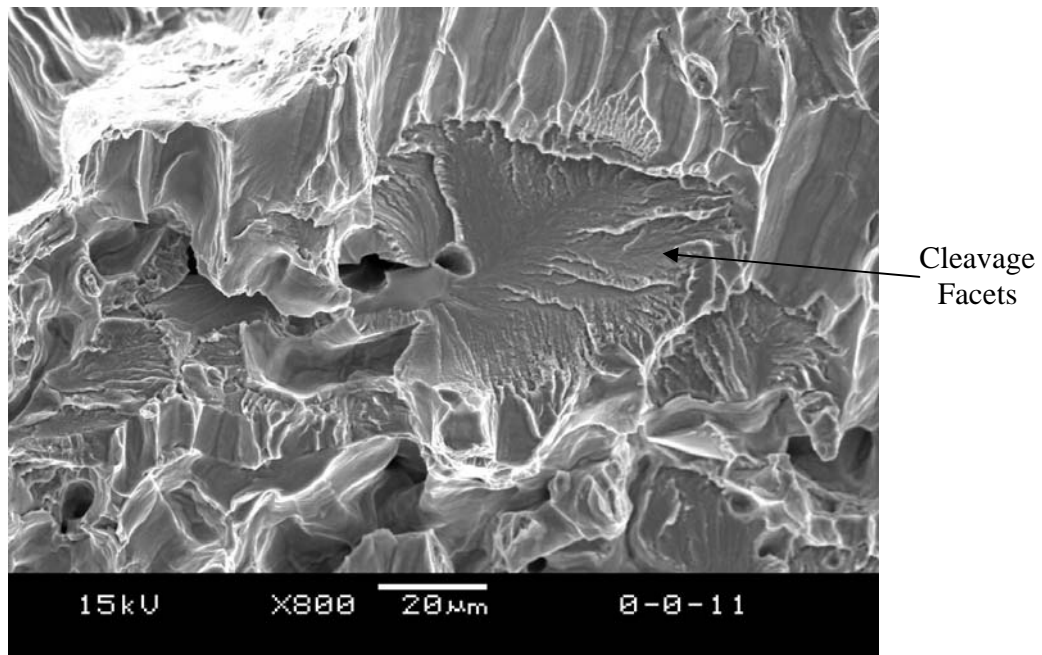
0-0 tensile fracture surface, showing presence of dimples with local cleavage facets.
